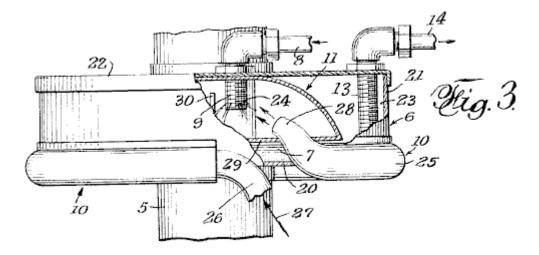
is a partial side elevation and partial sectional view of the carburettor, showing additional structural details
